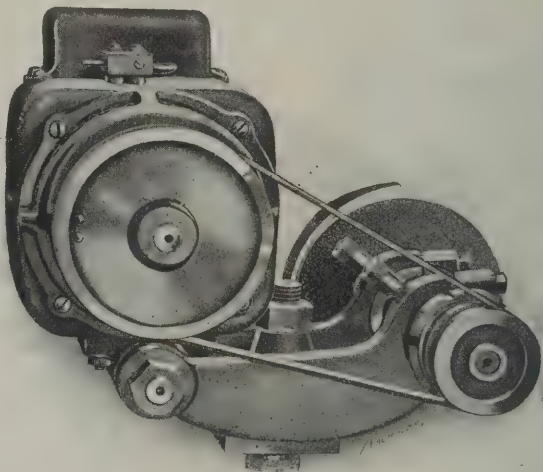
Chicago Pneumatic Tool Co's Electric Grinder
